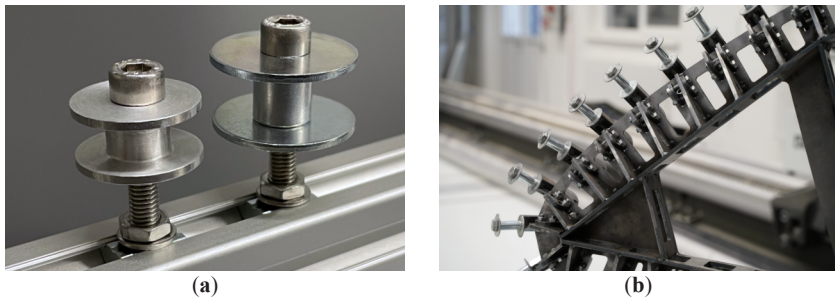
Winding pins and fixture. (a) lathed winding pin (left) and sleeve/washer winding pin (right) mounted to an aluminum profile, (b) winding fixture designed as a reconfigurable metallic frame with adjustable adapters to hold the winding pins in place.
